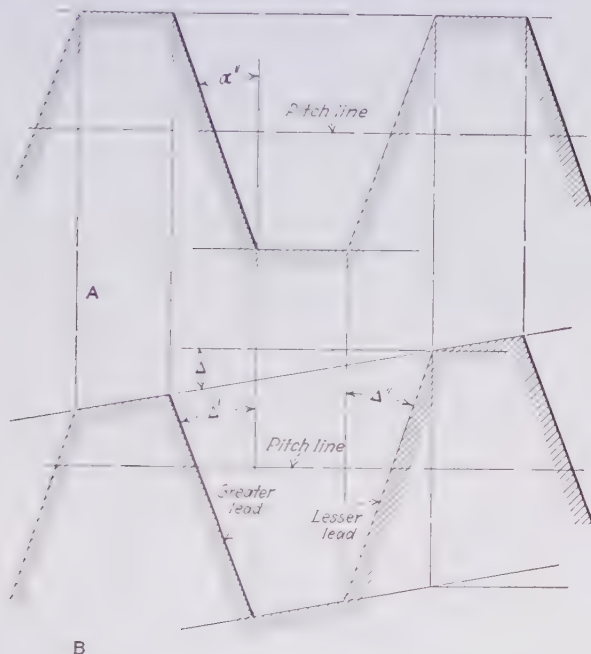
A, Axial section of helicoid containing cutting edges. B, Axial section of relieved surfaces.
